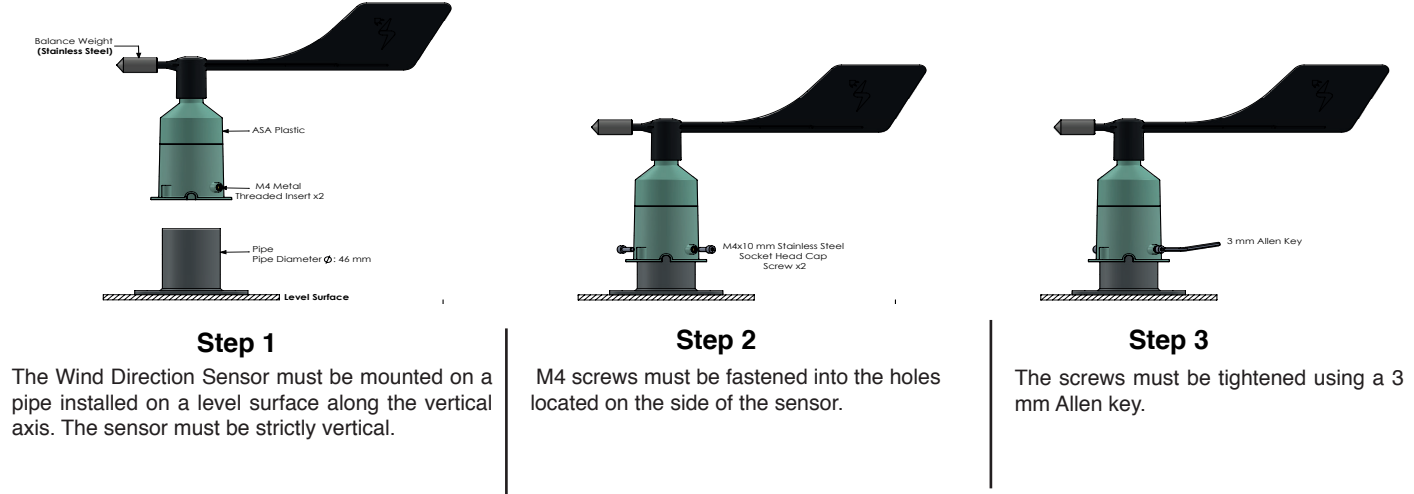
Plastic Wind Direction Sensor Pipe Mounting
